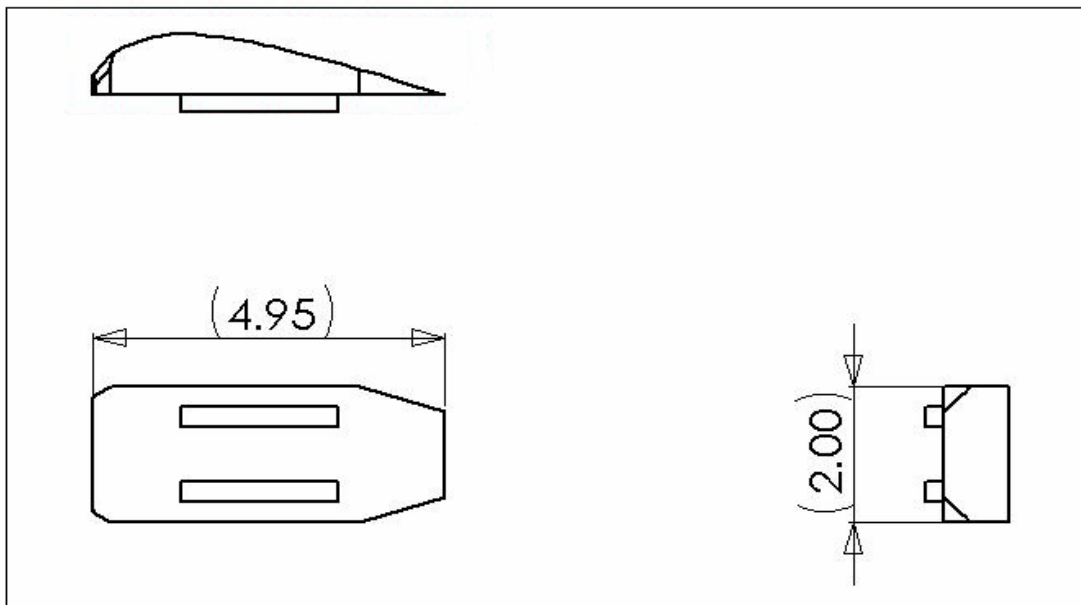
3 View Drawing of Fuselage Testbed (Top)
